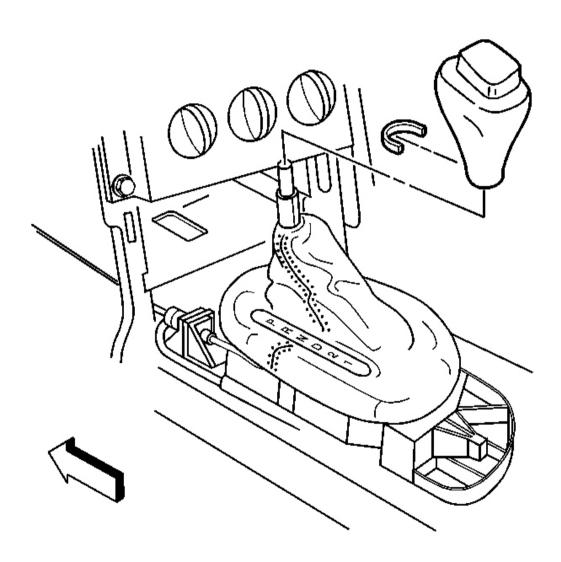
Floor Shift Control Knob & I/P Accessory Trim Plate Courtesy of GENERAL MOTORS CORP.
